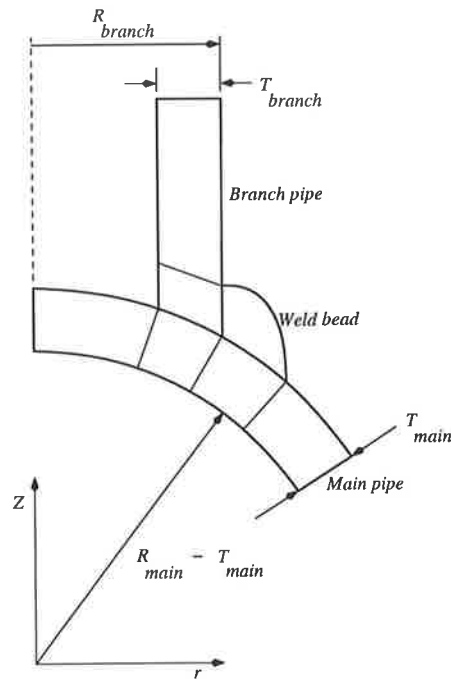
Typical cross-section of a branch on pipe weld.
